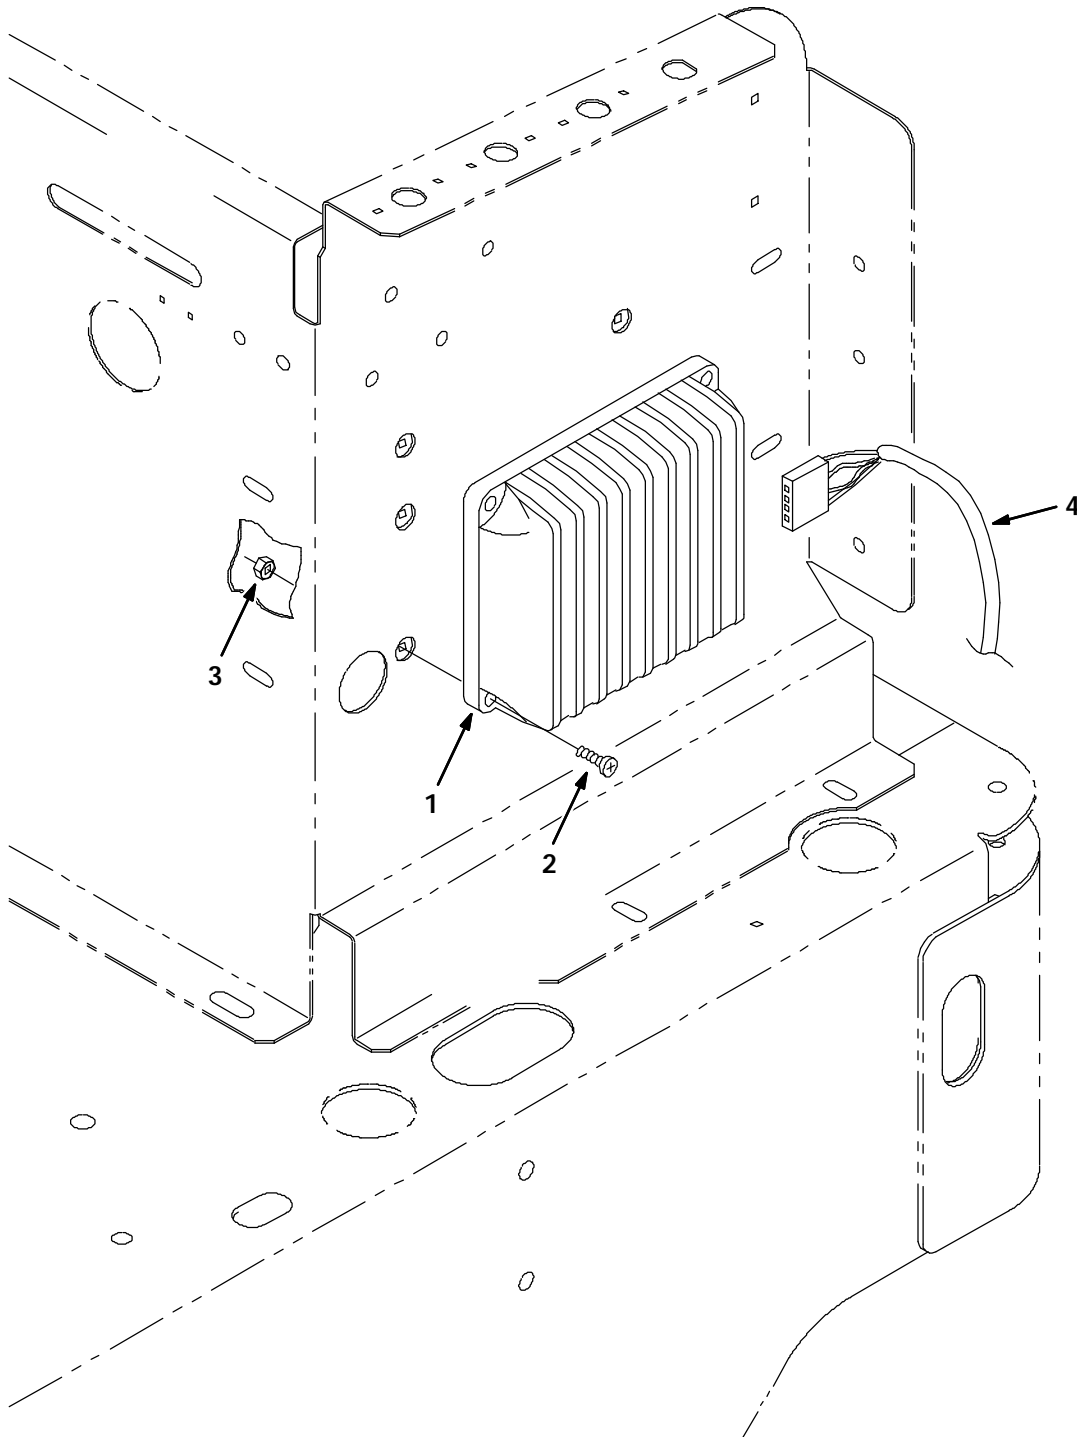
HEAVY DUTY CONTROLLER INSTALLATION
